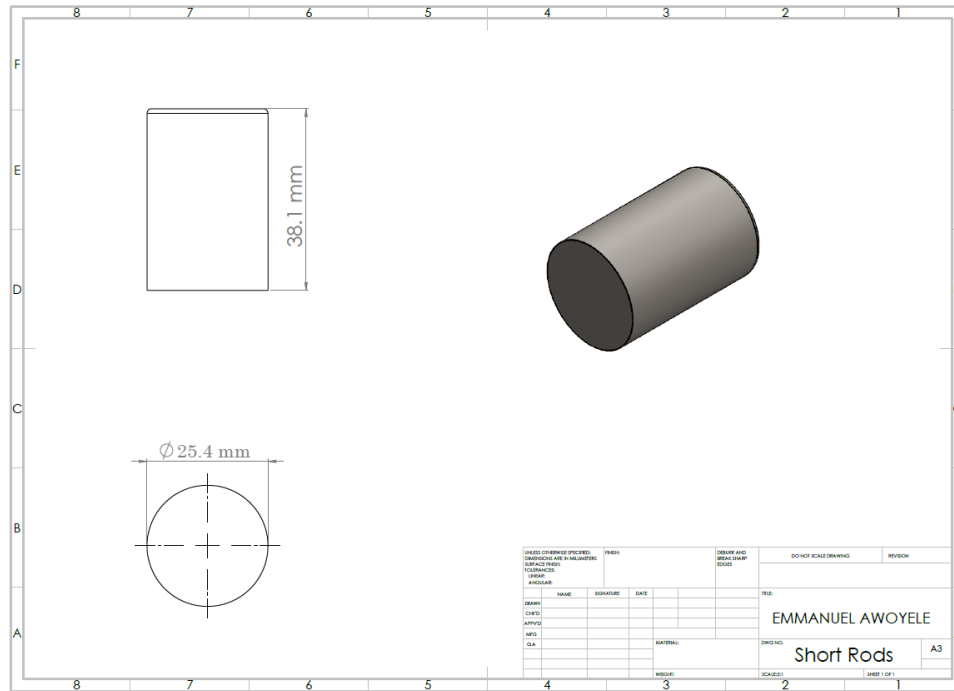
Drawing of a typical short rod produced by the Engineering Machine Shop.
